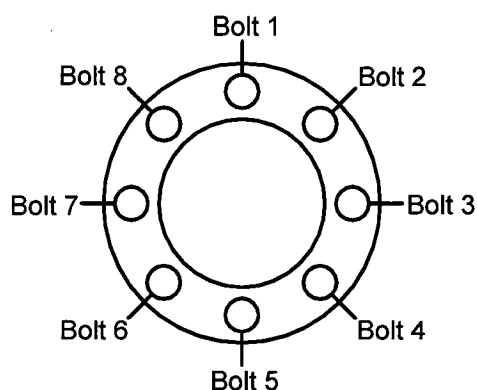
Bolt Numbering System for Simulating Damage in the Mechanically Fastened Joint
